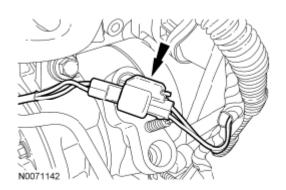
Locating Crankshaft Position Sensor Wire Harness Retainers Courtesy of FORD MOTOR CO.
